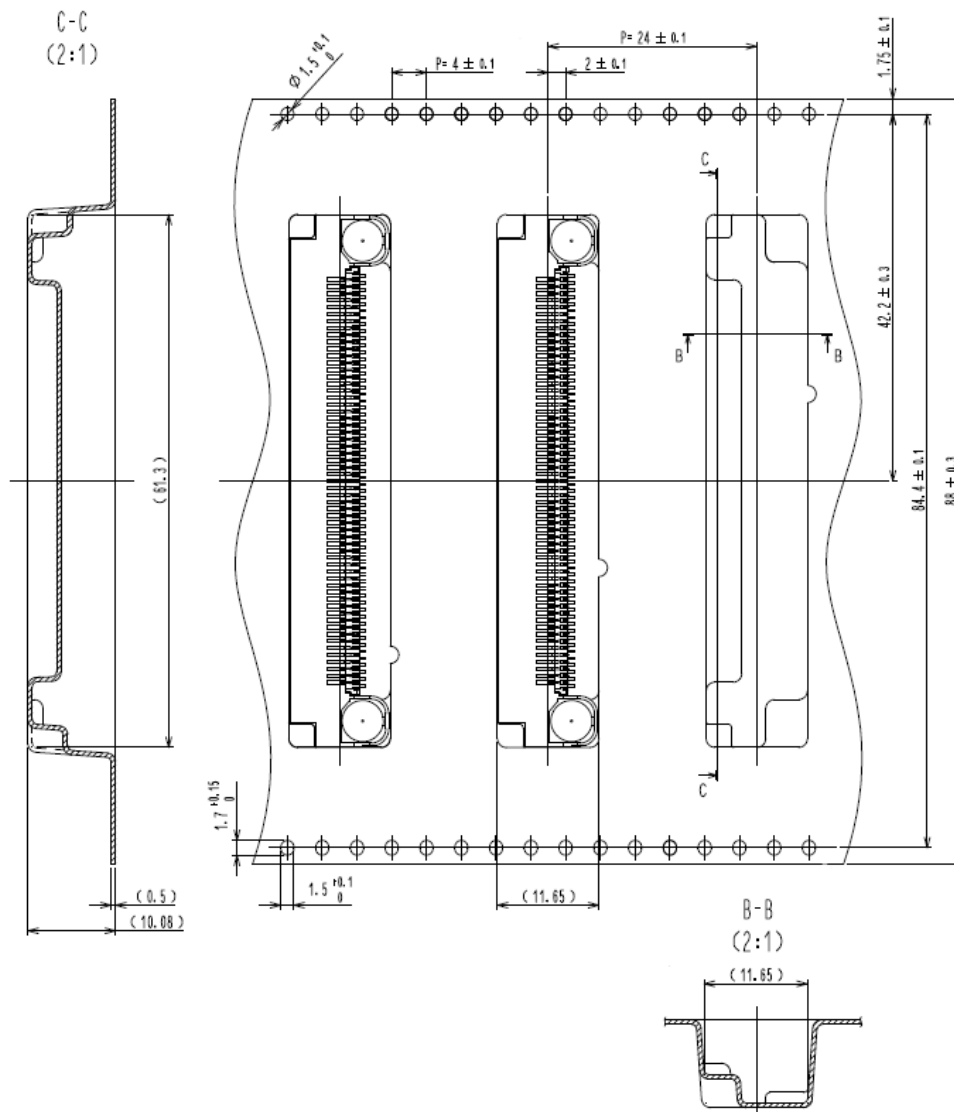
Embossed Carrier Tape for ER8 Right Angle Receptacle (dimensions in mm)
